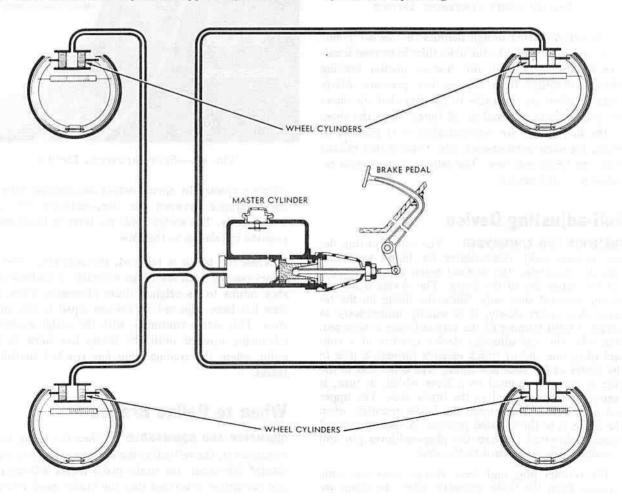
HYDRAULIC BRAKE SYSTEM
